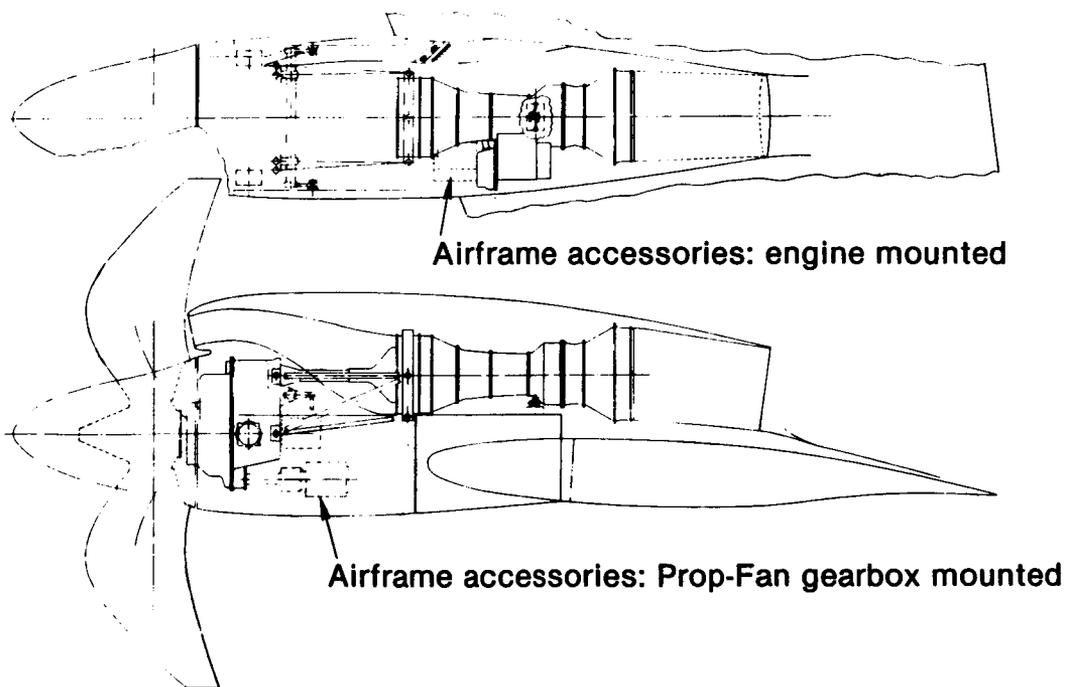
Aircraft Accessory Mounting Options for an Offset Gearbox Installation - Two mounting options are provided for location of aircraft accessories. (J27638-11)
